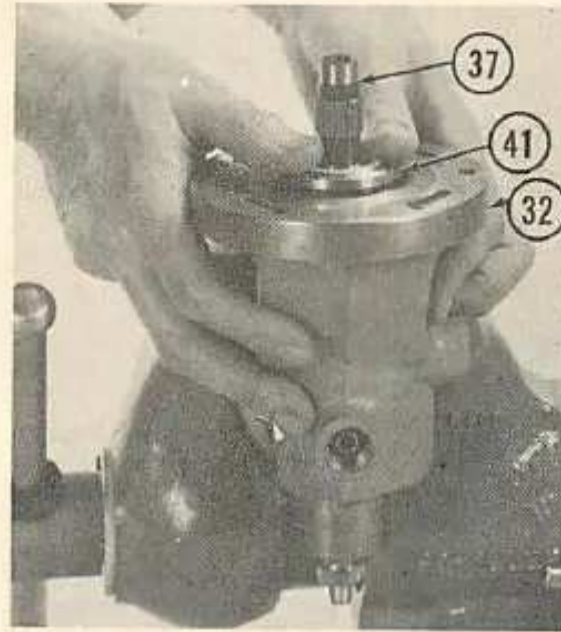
When pushing bearing support (41) for stub shaft (37) into housing (32), take care not to damage sealing "O" ring.
